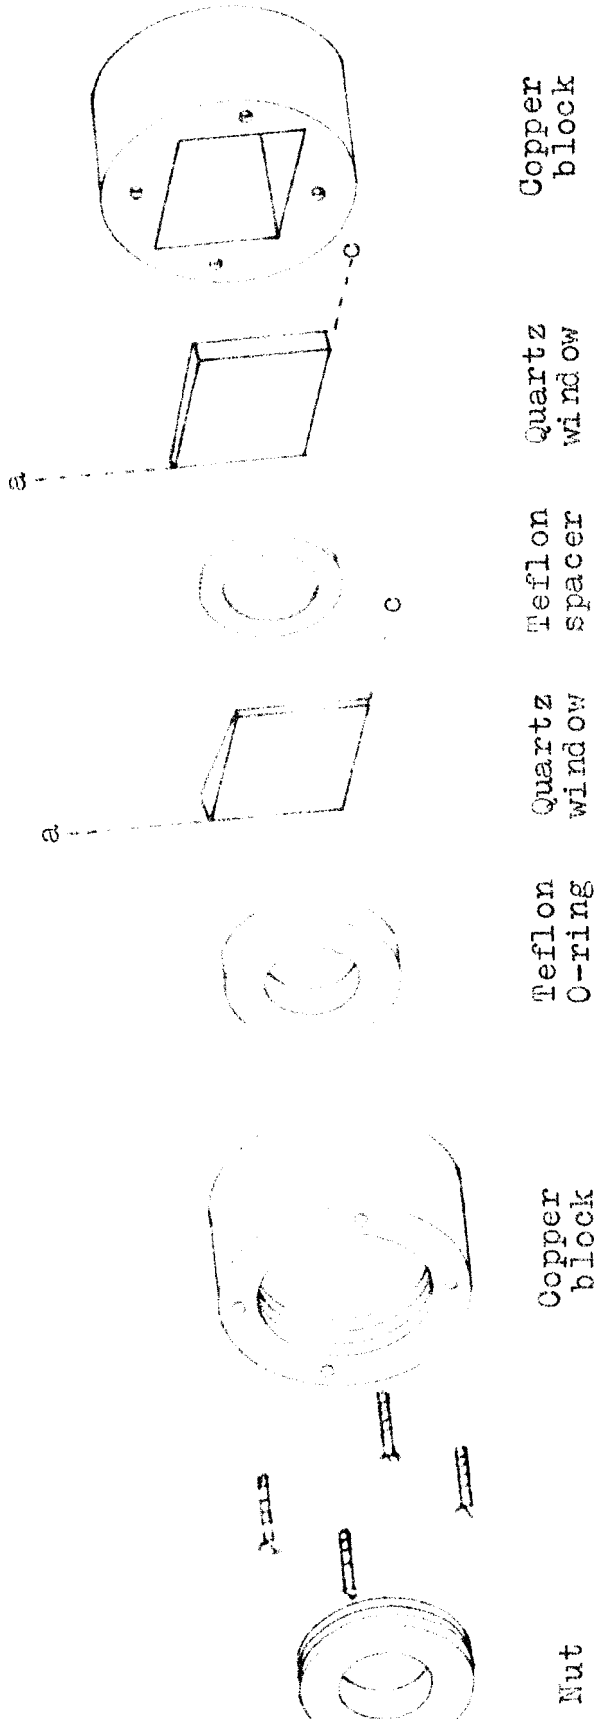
Exploded view of the oven used in the near infrared measurements.
